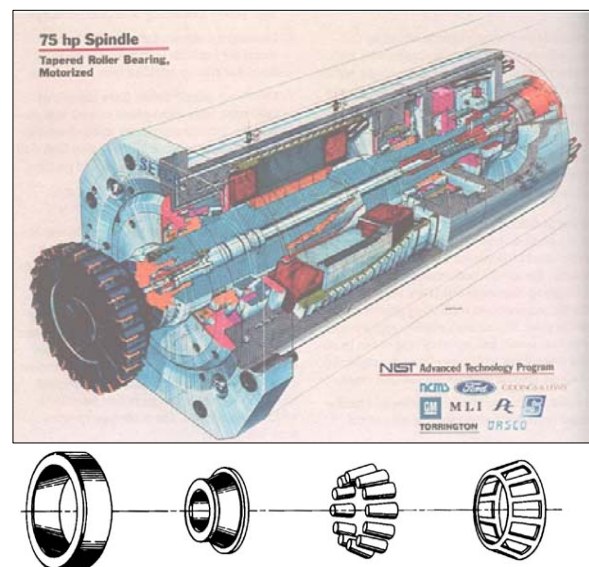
Top: Diagram of the prototype heavy-duty 75-hp spindle. The assembly measures approximately 25 cm in diameter and 64 cm in length. Bottom: Diagram of the tapered bearing designed for maximum load capacity.
